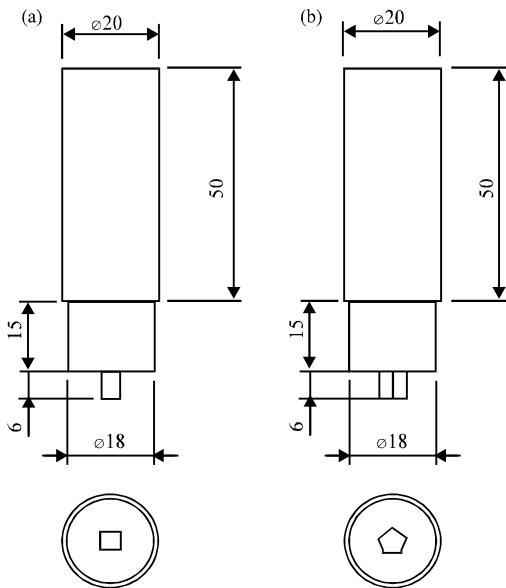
(a-b): Friction stir welding tools, (a) Square pin profile and (b) Pentagonal pin profile, All dimensions are in mm
